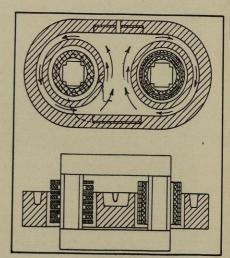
The Röchling-Rodenhauser Single-phase Furnace (elevation and plan).
